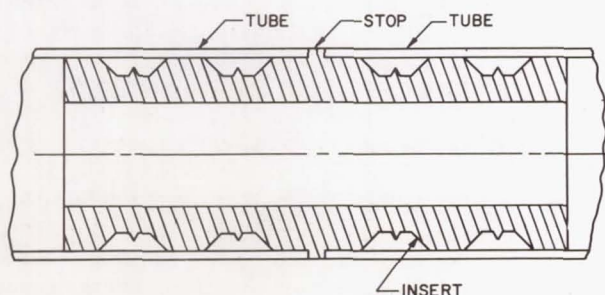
Basic Configuration of Insert and Tubes for HERF Assembly Techniques
